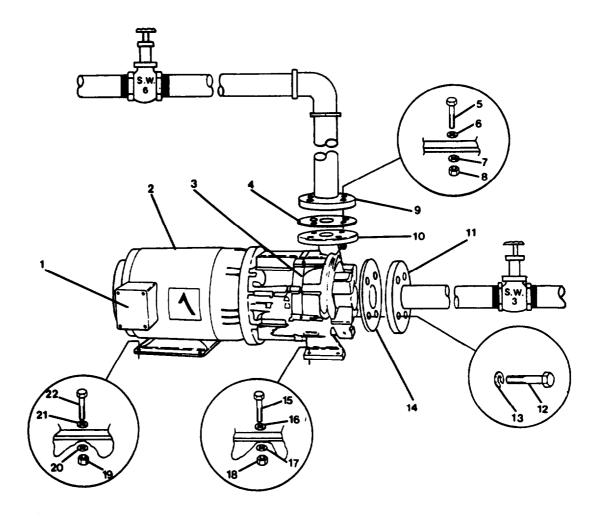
Centrifugal Pump Unit (Auxiliary Seawater Cooling).
